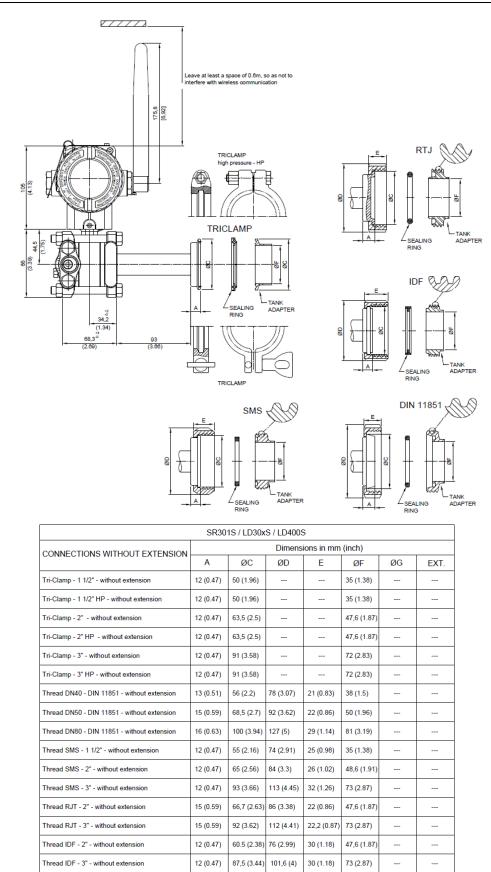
(e) – Dimensional Drawing and Mounting Position for the LD400 WirelessHART™ – Sanitary Transmitter without Extension
